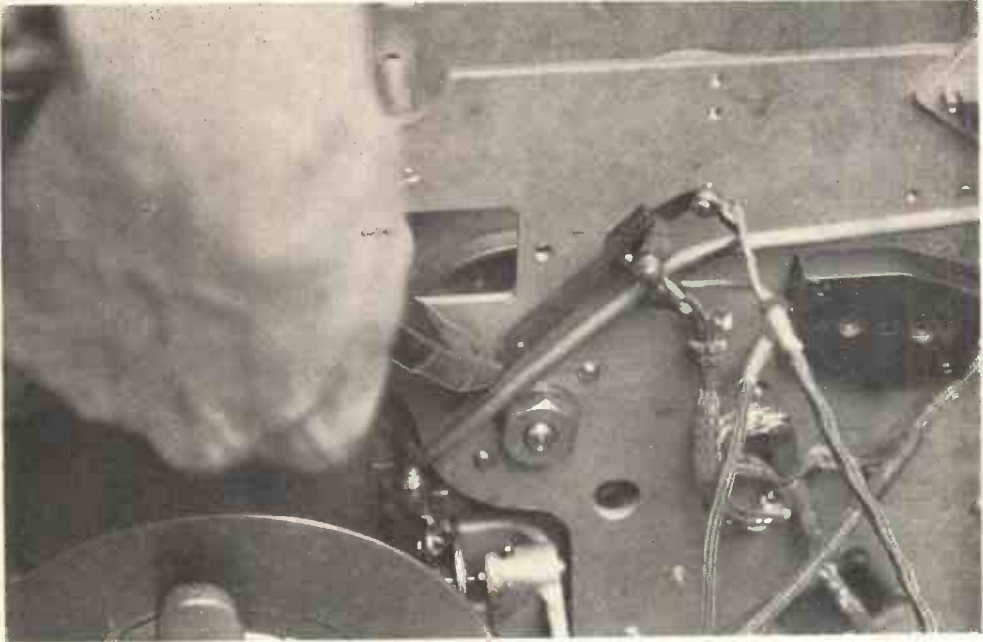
ADJUSTING CUT-OUT SWITCH CONTACTS (S.1).
